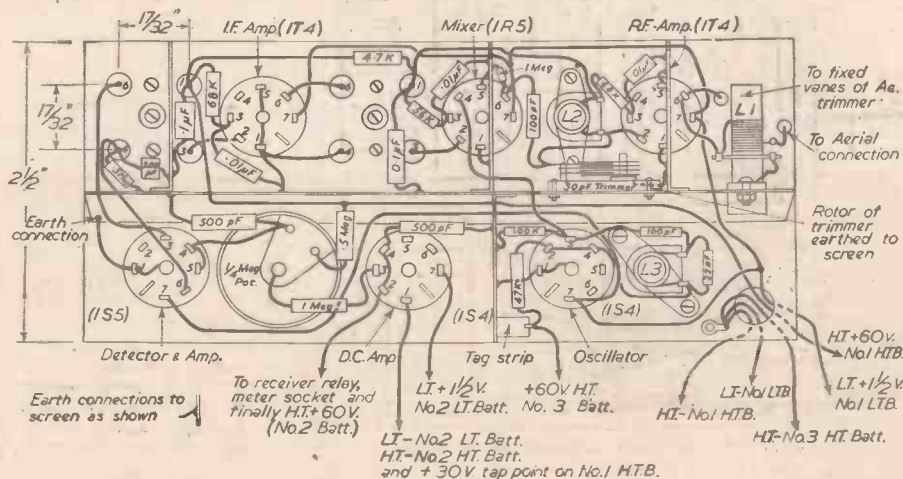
(Top right).—The R.F. and I.F. side of chassis. (Right below).—The underside of chassis.
